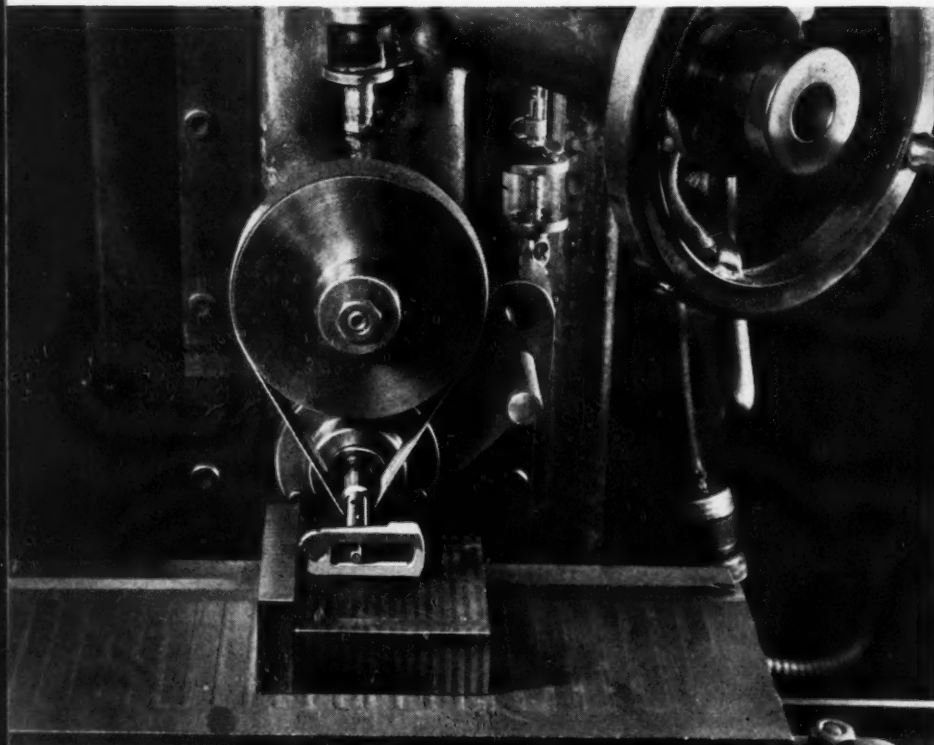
(Above Left) Milling Inside Faces of Corrector Frame to a Tolerance of 0.0005 Inch. Tolerance for Center Location is 0.0003 Inch
